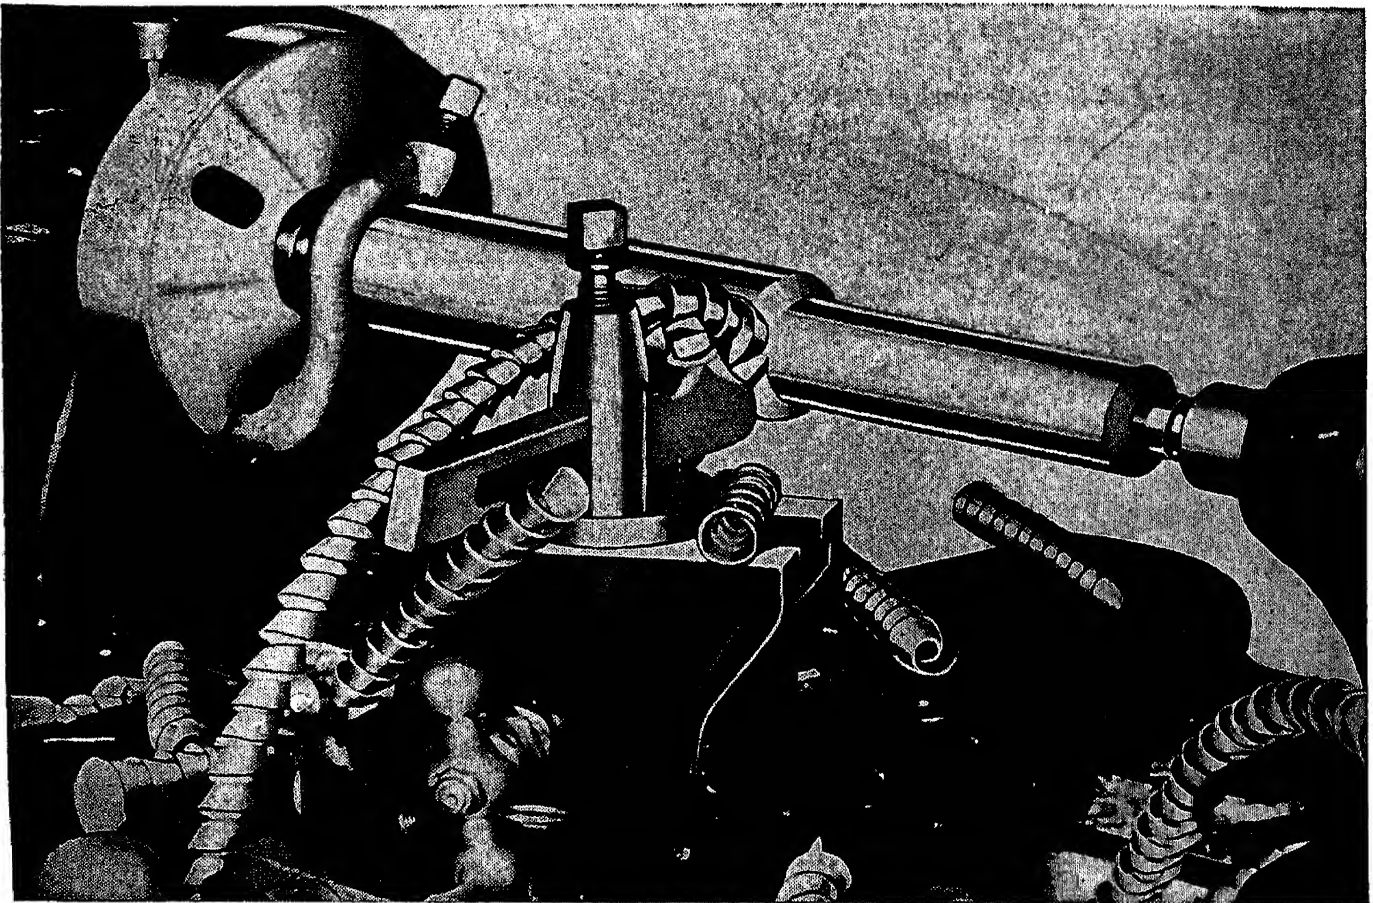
Turning a steel shaft between centers. (Courtesy South Bend Lathe Works.)
